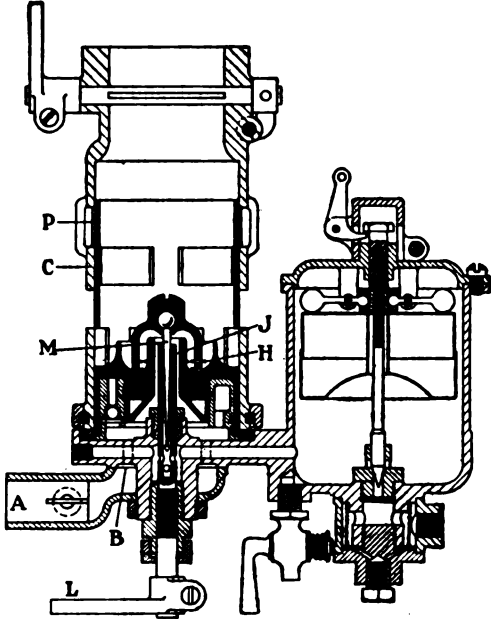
Modern American carburetor of design including unusual features. Auxiliary air supplied through ports uncovered at high engine speed by tubular piston P moving in cylinder C having upper and lower ports. " Metering pin" M attached to piston P by ball at its upper end but free to move upward as gasoline is drawn up around it from main jet J, the discharge aperture in which is regulated by the position of metering pin in it. Hot air hose A. Series of holes B admit main supply of air to cylinder C, the air passing through annular channel around spray-jet H. Lever L furnishes adjustment to conform with size and design of engine by raising or lowering jet H, thereby changing its relation to metering pin.
